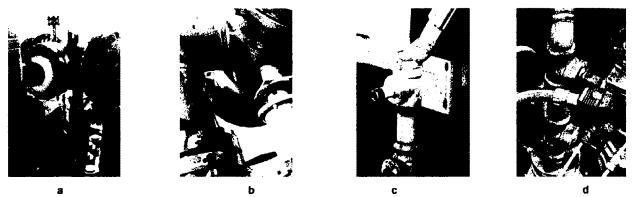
Magnetic flux inspection on another 10% of the welds: (a) heat exchanger inspection; (b) process tubing connection showing crack and hole from poor penetration; (c, d) same process tubing repaired.
